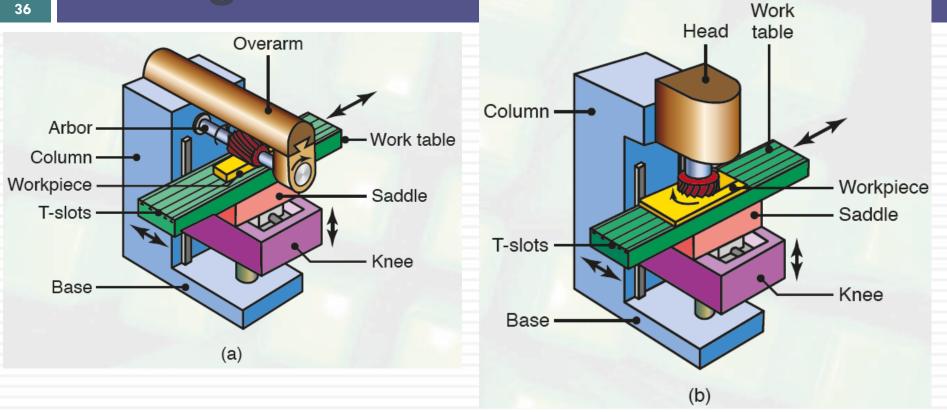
(a) Schematic illustration of a horizontal-spindle column-and-knee-type milling machine. (b) Schematic illustration of a vertical-spindle column-and-knee-type milling machine. *Source:* After G. Boothroyd.
